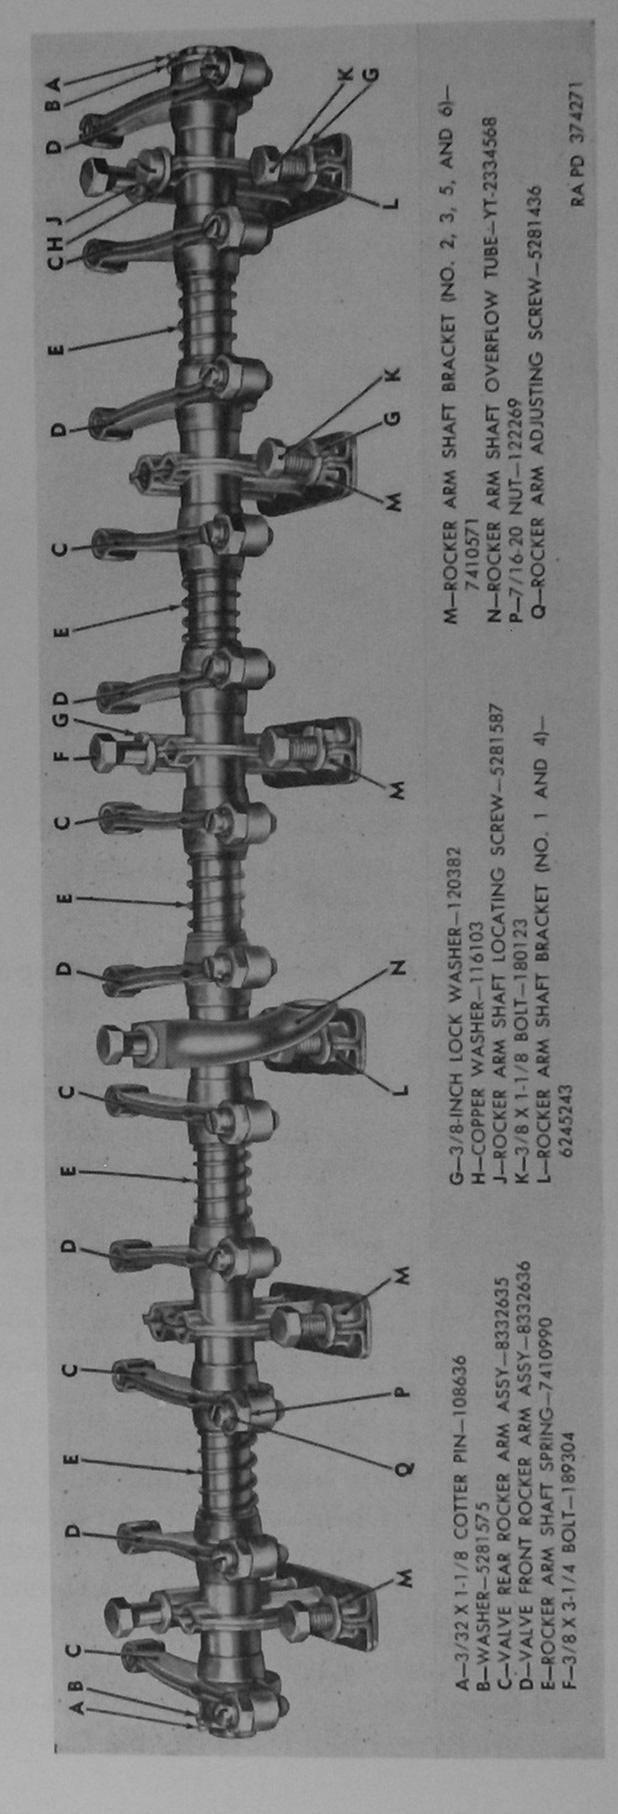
Valve rocker arms, shaft, and brackets assembled.
